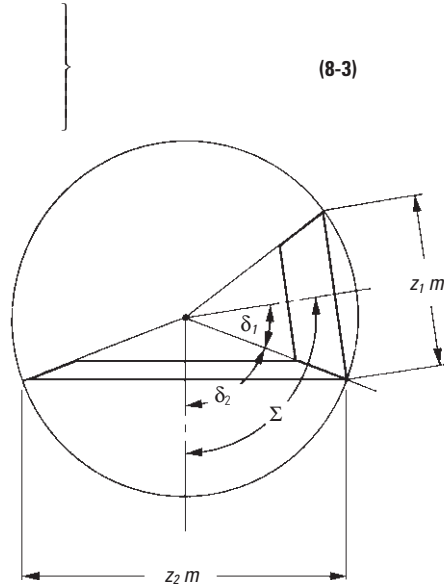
The Pitch Cone Angle of Bevel Gear
